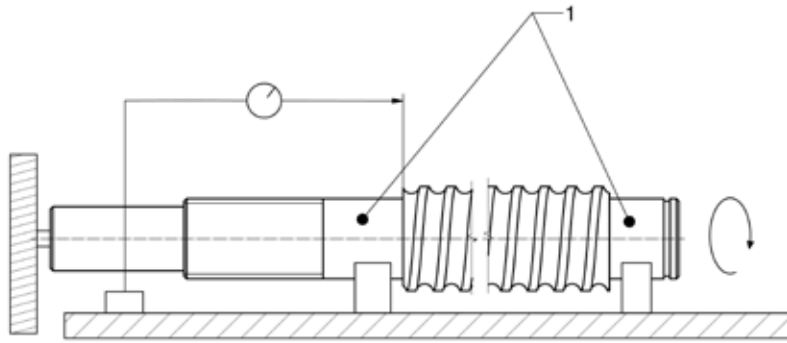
Measurement of the axial run-out $t_{8,2}$ of the bearing surfaces
